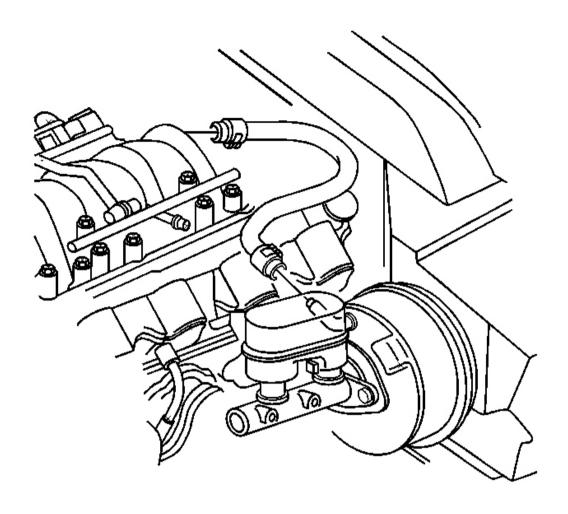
Vacuum Booster Hose Courtesy of GENERAL MOTORS CORP.
